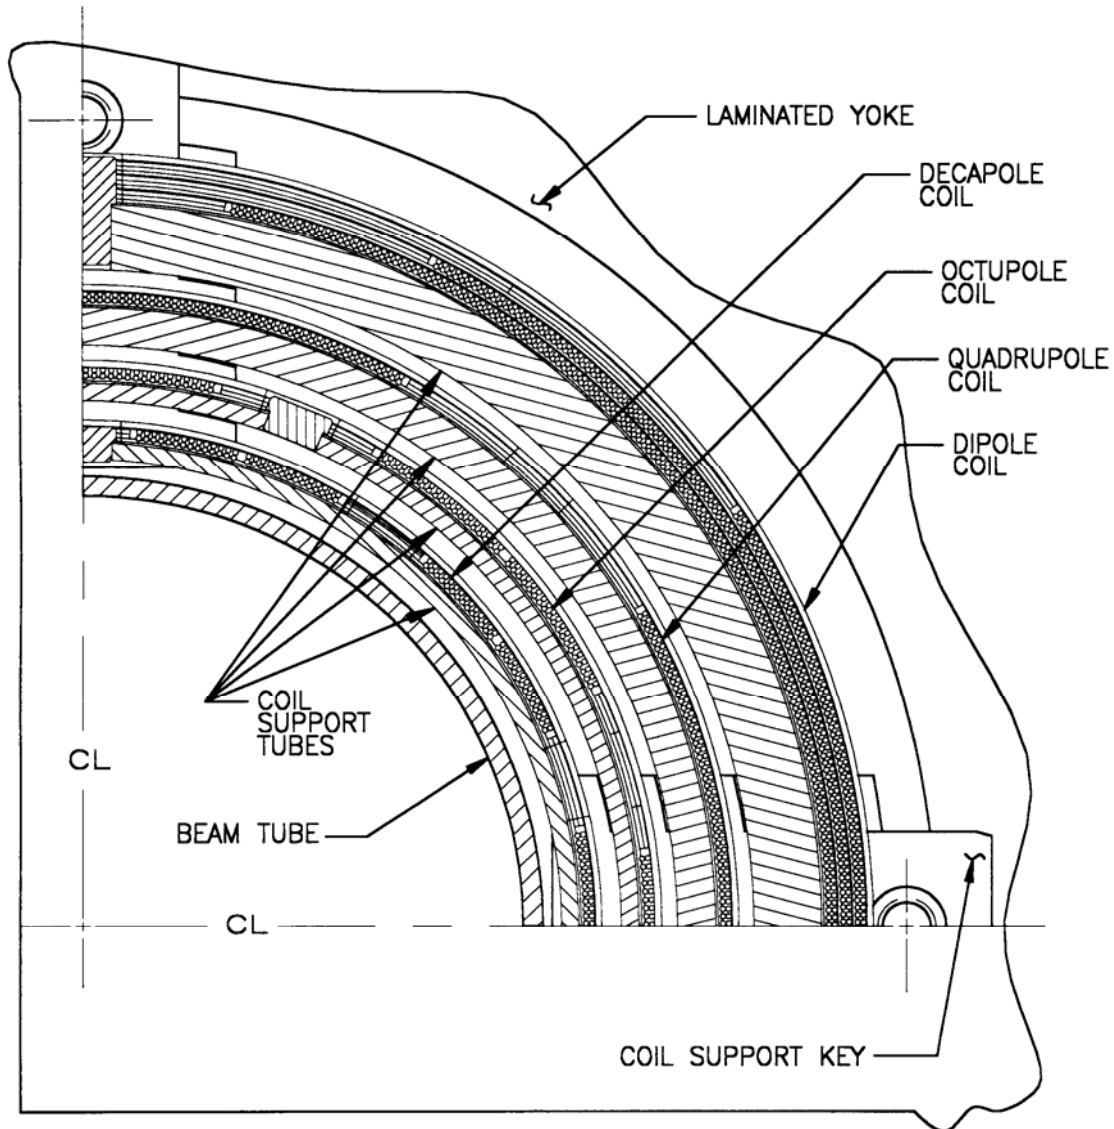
Arc corrector coil cross-section (beam tube i.d. = 69 mm).
